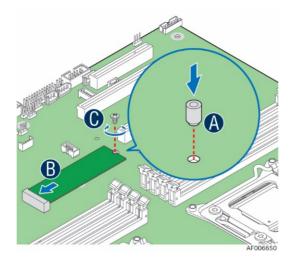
M.2 Storage Device Installation - S2600CW Board Family
